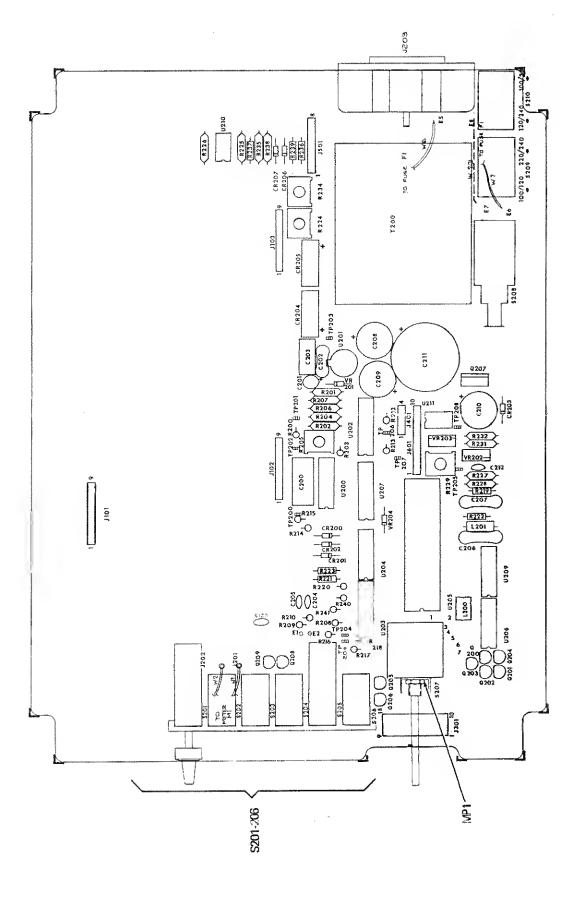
A1 8920A Main PCB Assembly (cont)
